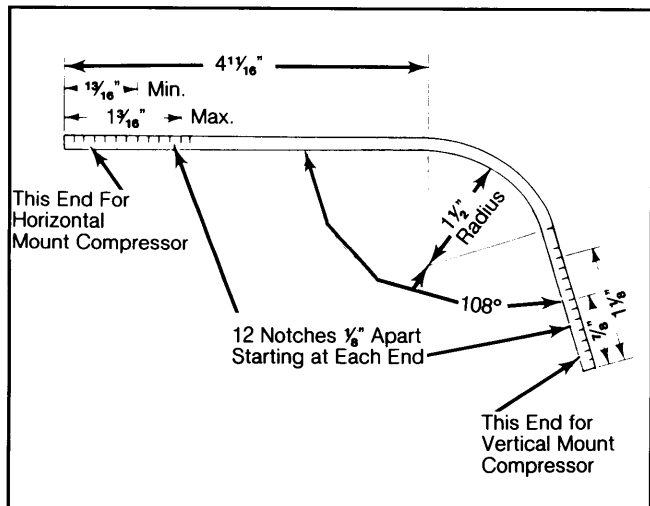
Dimensions for York Compressor Oil Level Dipstick
